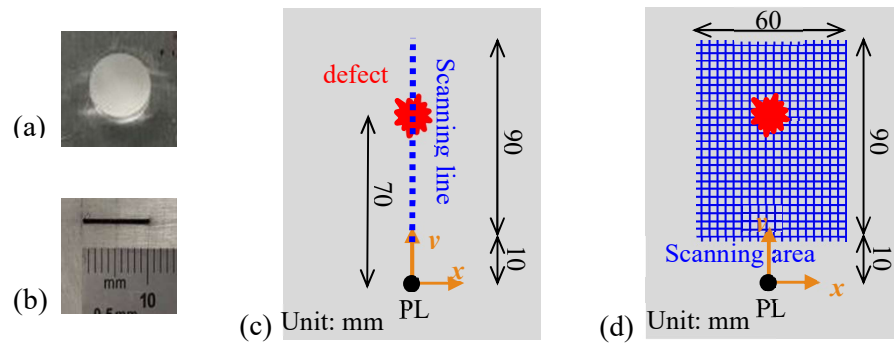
Schematic of specimen set up: (a) surface bonded quartz rod, (b) machine milled crack, (c) 1D line inspection set up, and (d) 2D area inspection setup
